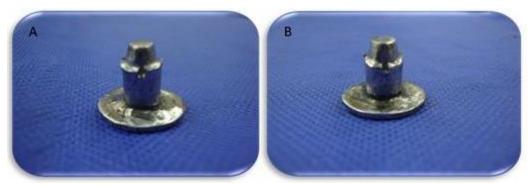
Finished master metal die. (A) Shoulder finishing line. (B) Chamfer finishing line.
